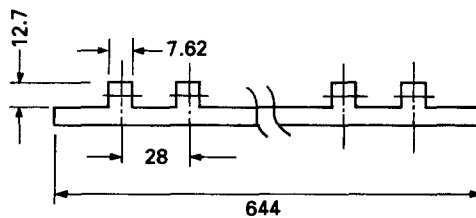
Geometry and loading of a blade stiffened panel (Example 4).
